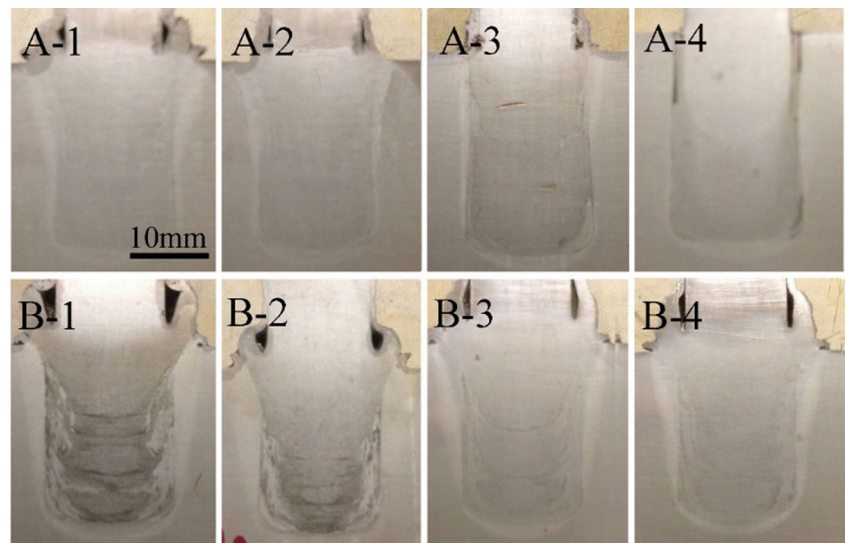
Macro observation of types A and B underwater welded joints
